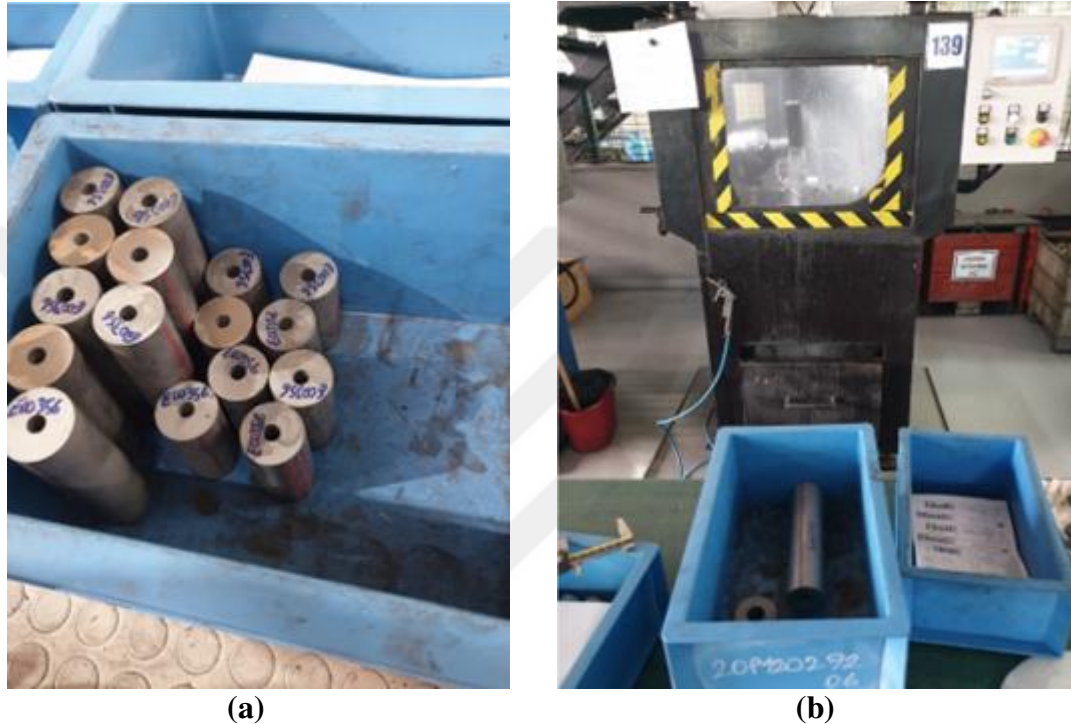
Raw WC-Co (a), WC-Co Cutting Machine (b)
